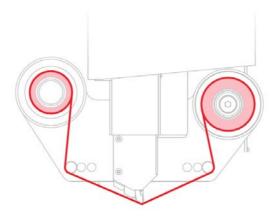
Foil Inserted in fead of Flat Bed Foil Printer
